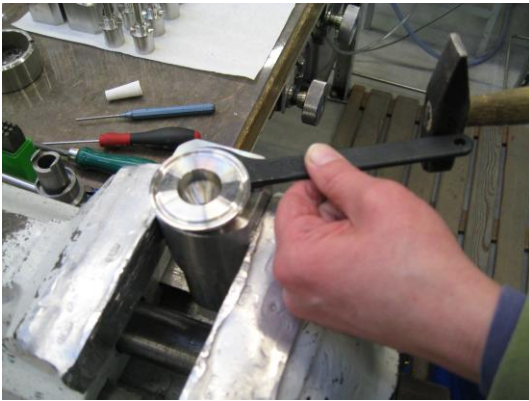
Installation of the O-ring disc with a C-spanner with nose
